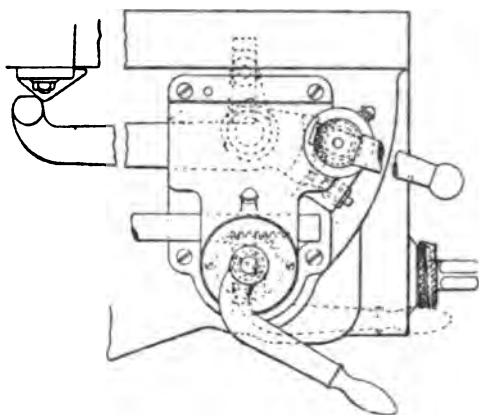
Trip Movement, B. & S. No. 5 Machine.
